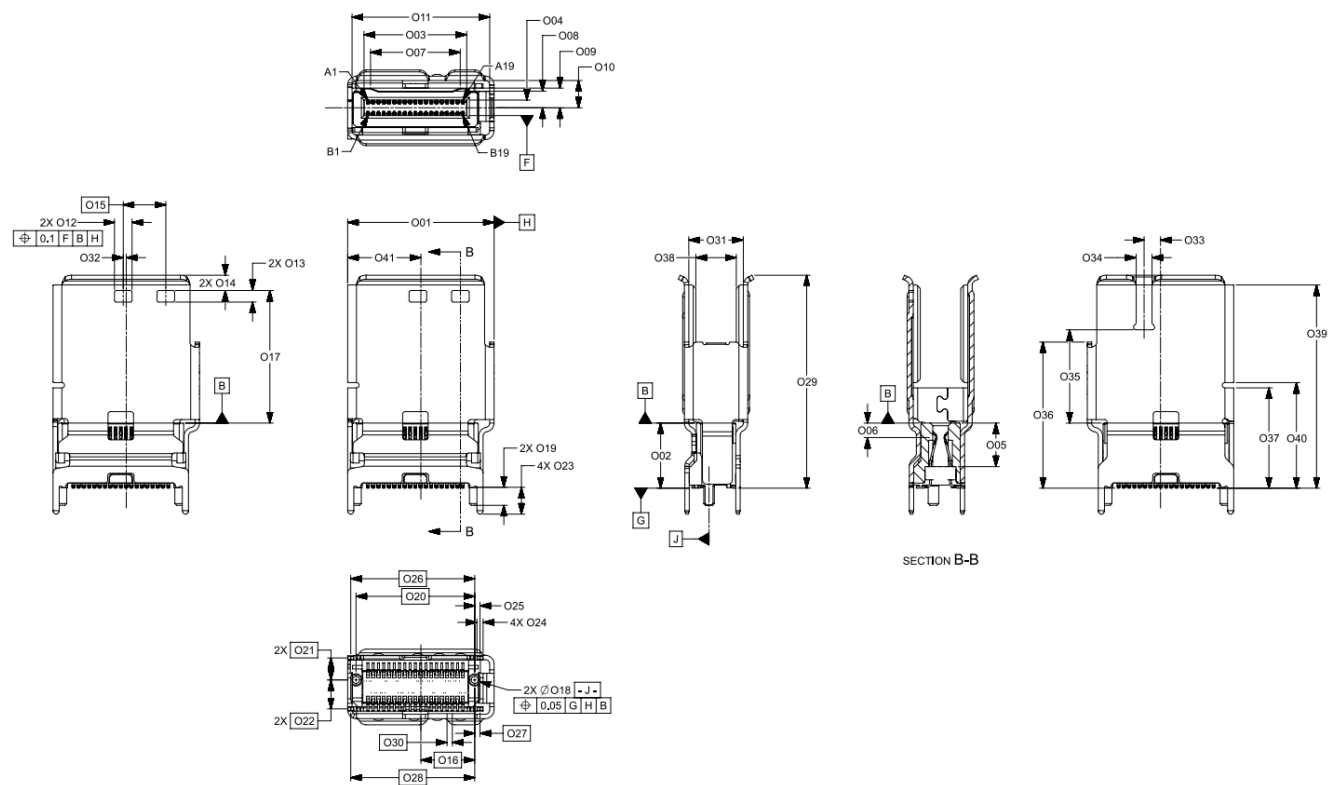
38-Pin Style B Connector Receptacle Dimensions
